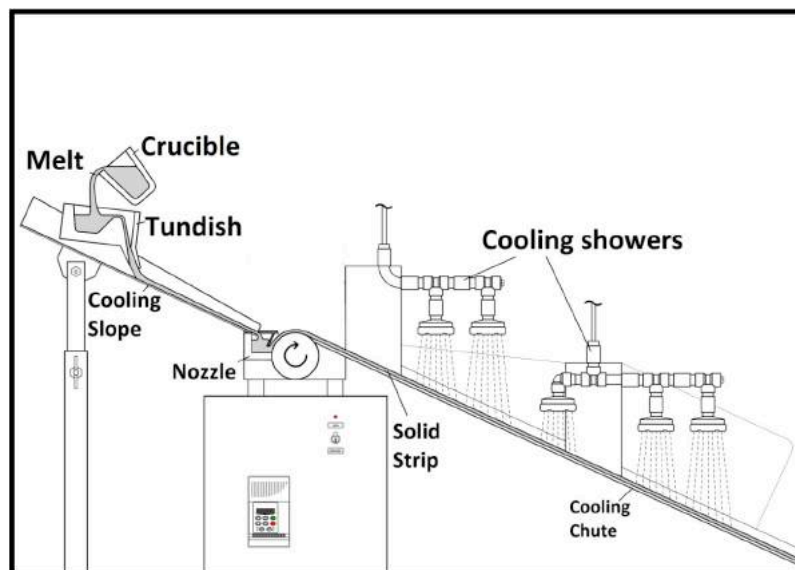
Schematic diagram of the machine used for manufacturing the strips.
